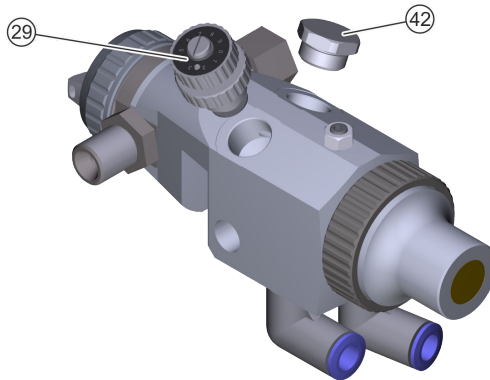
Exploded view (version only with horn air connection and atomizer air control)
